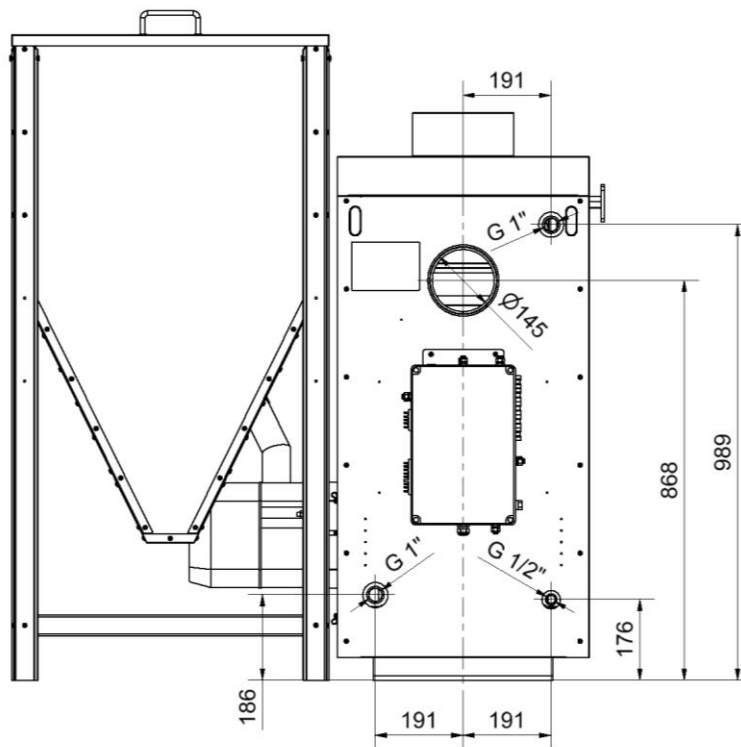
BENEKOV K20 and K25 boilers connection dimensions
